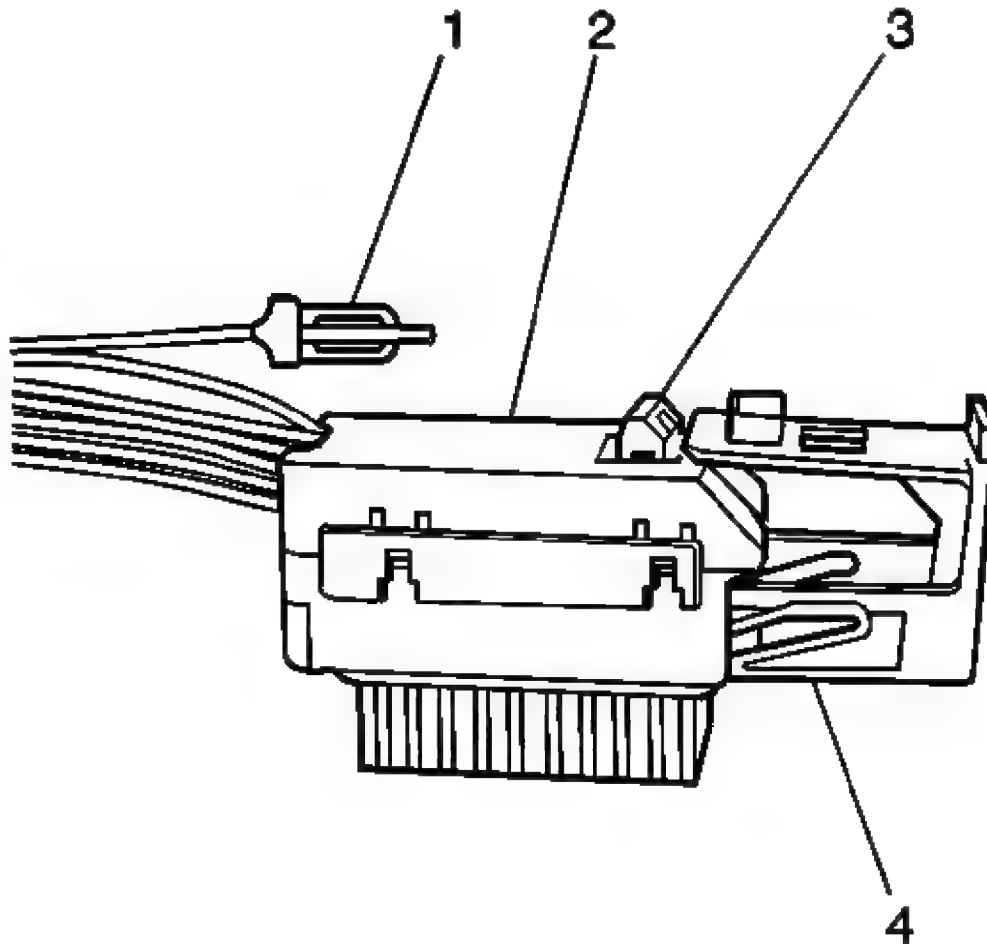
View Of Connector Position Assurance (CPA) Flex Lock Button
